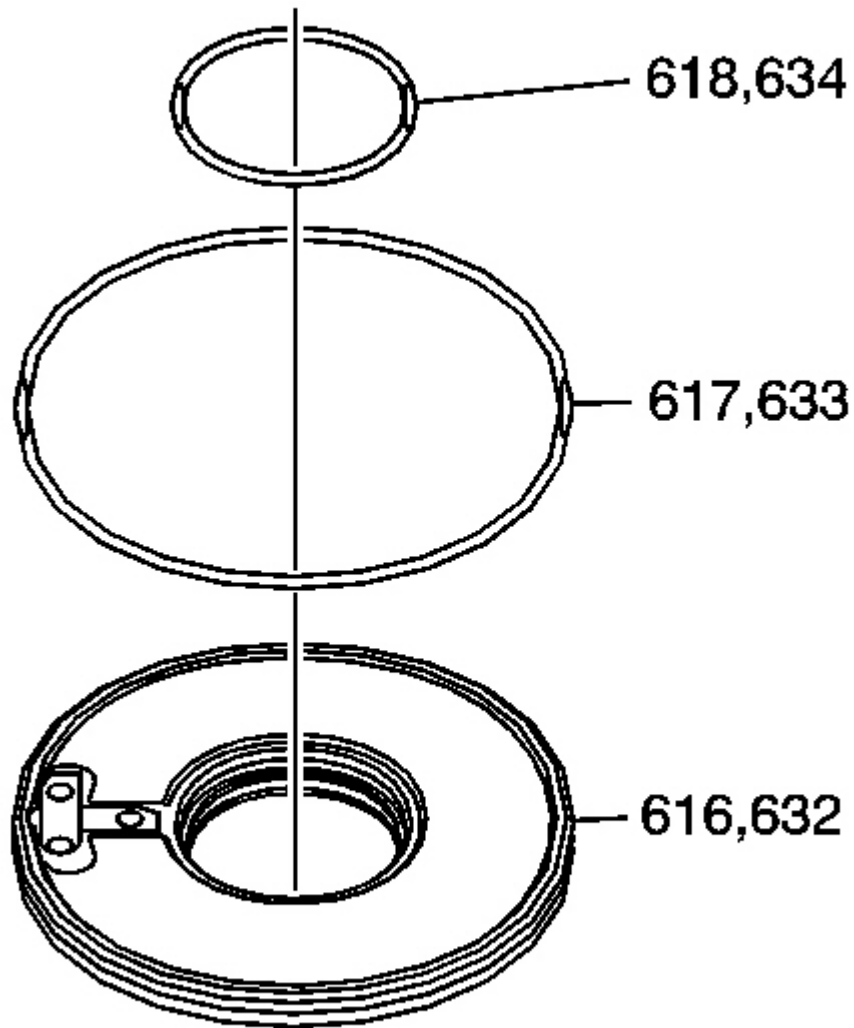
Inner, Outer O-Ring Seals & Clutch Piston
